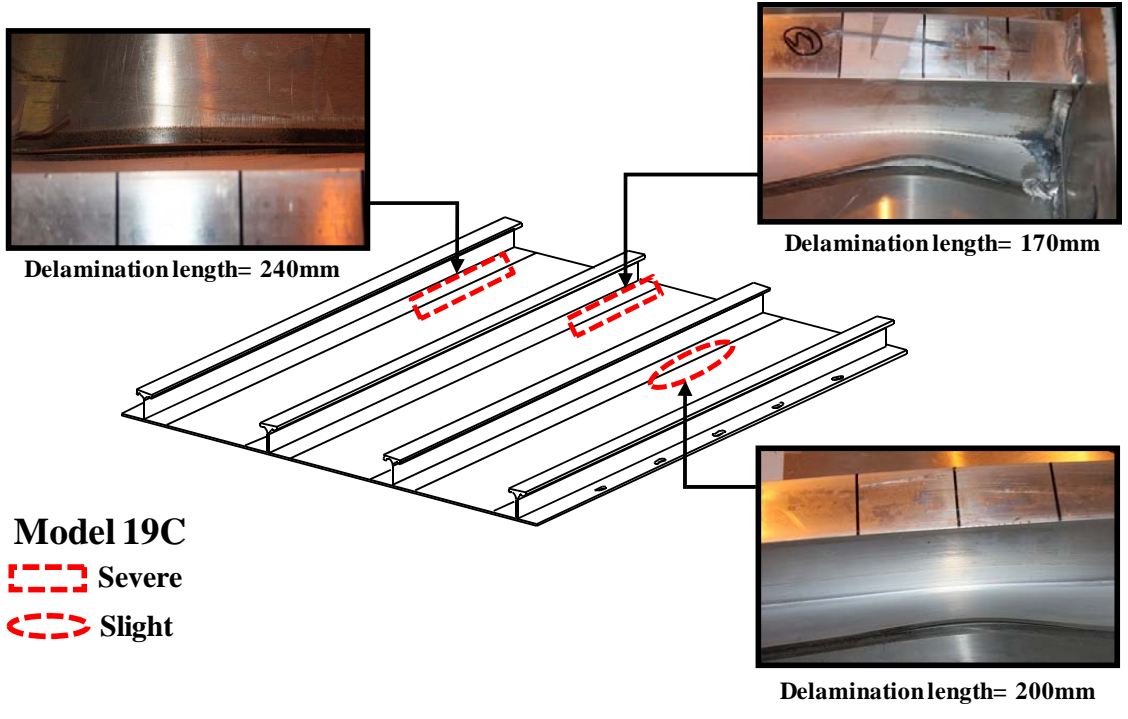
(c) Photo of the delamination failure in test structure 19C, taken at the end of testing
